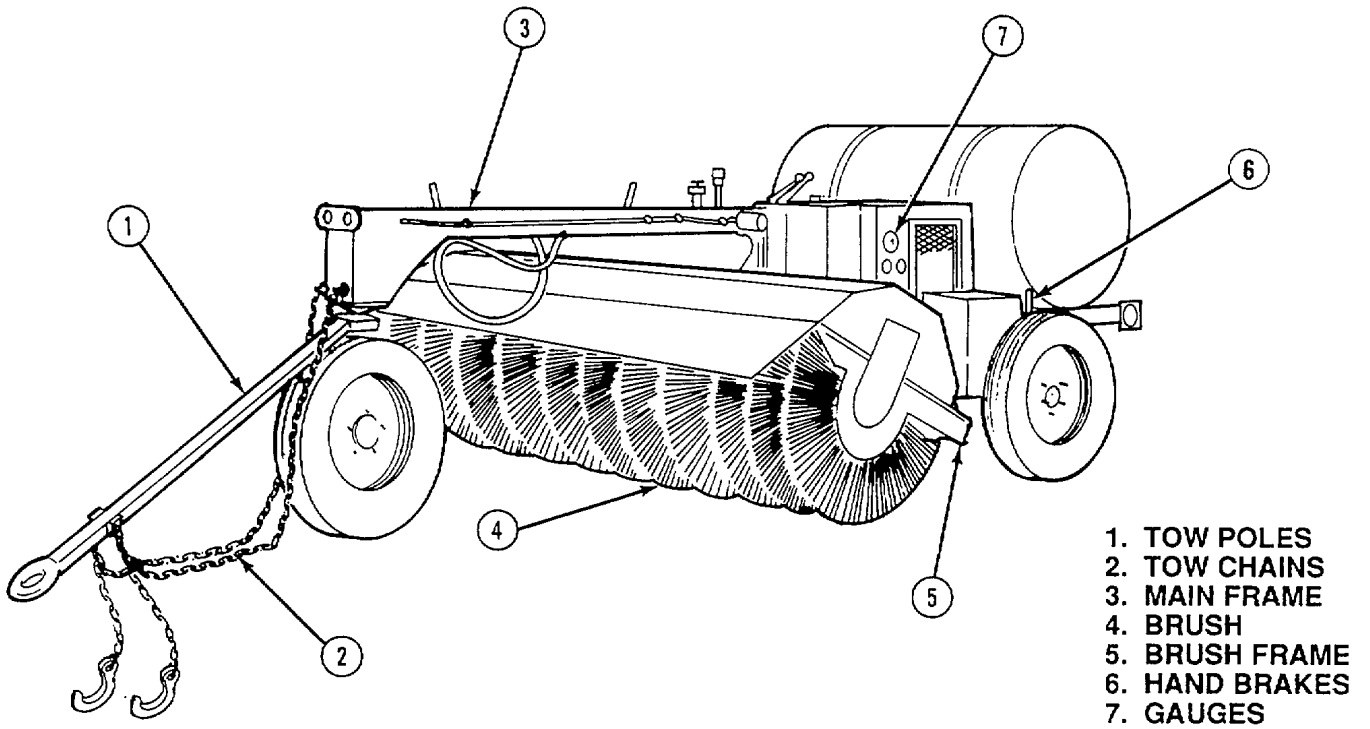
Rotary Towed Sweeper 53MH - Left Front View
